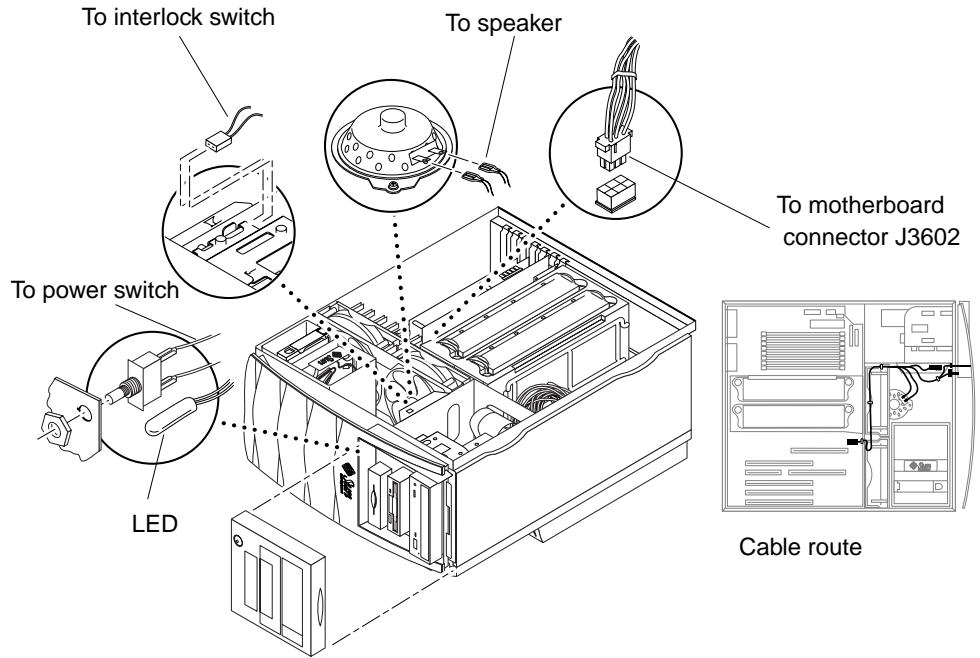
Removing and Replacing the Combined Cable Assembly
